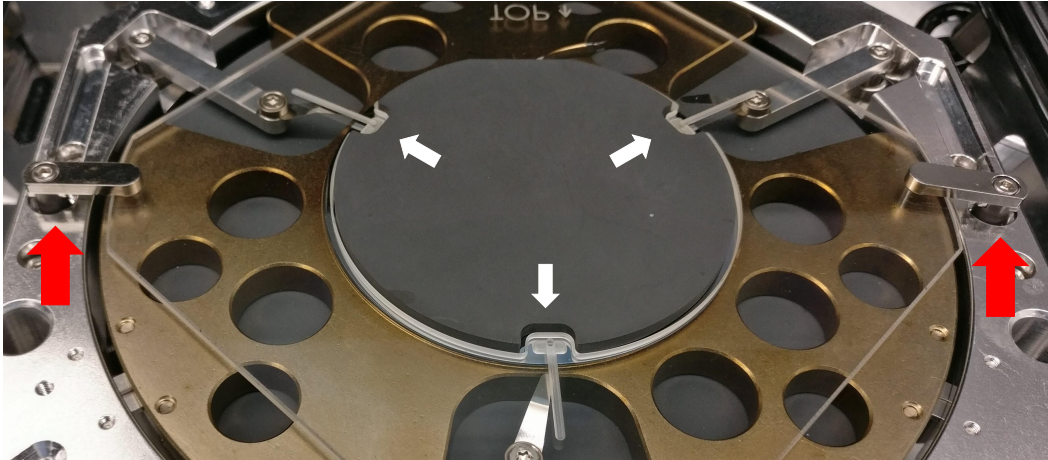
Picture of the bond assembly with a wafer stack (not visible) hold in position by bond glass and the pressure disc insert
